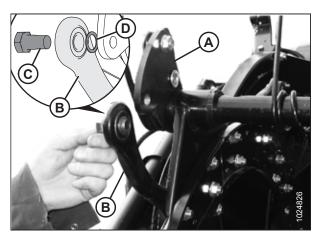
Bar Crank Attachment Holes and Link Alignment
